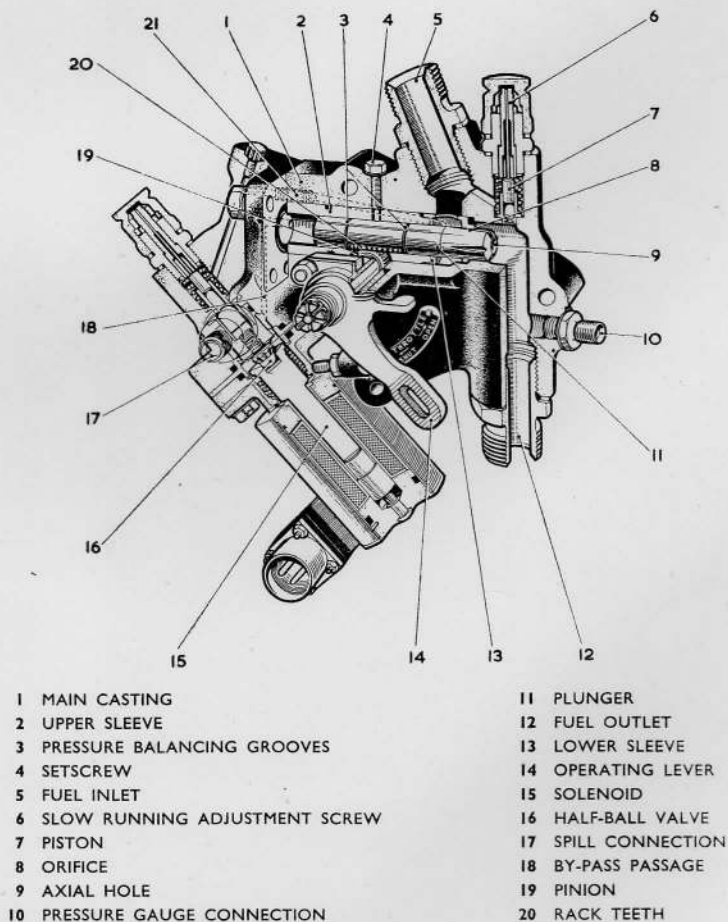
Sectioned view of throttle valve, Type T.V.B.4
